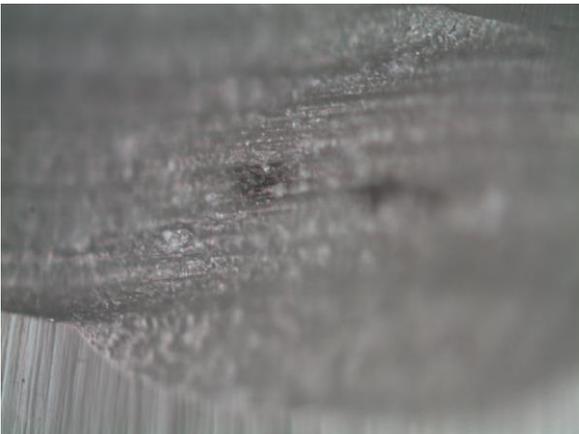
optical images of the defect after the removal of pmma resin by blade or abrasive paper.
